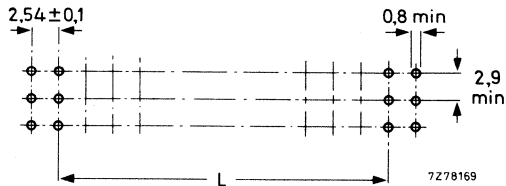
Hole pattern for single-row panel sockets. See Table 2, pages 10 and 11 for dimension L.
